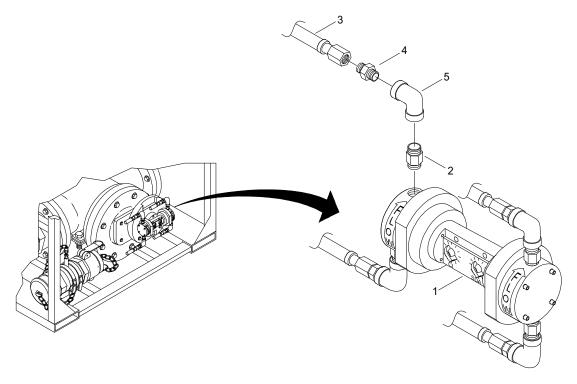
CI and SDA Pump Discharge Check Valves Removal.
